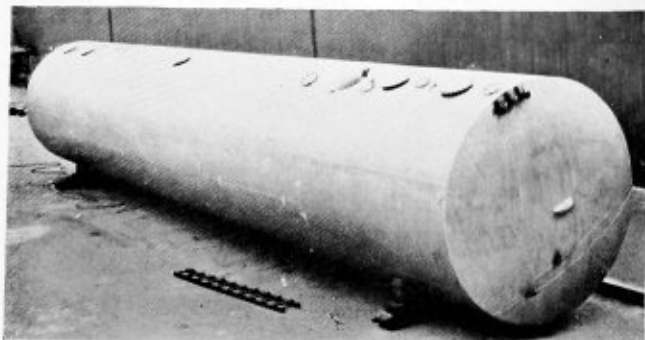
shows the partially assembled tube. At the lower right, the bolted joint of the two panel sections will be noted. These two flanges were not machined on the edge or outside surface, yet at no place in four such joints was there more than $\frac{3}{16}$ inch difference between two mating flanges along these outside unmachined surfaces. In general, the joints were much closer than this figure. The joint faces were, of course, machined to a definite fit. There was very little difference in thickness of the mating flanges.
